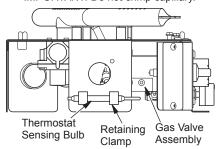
Location of Gas Valve Assembly and Thermostat Sensing Bulb
